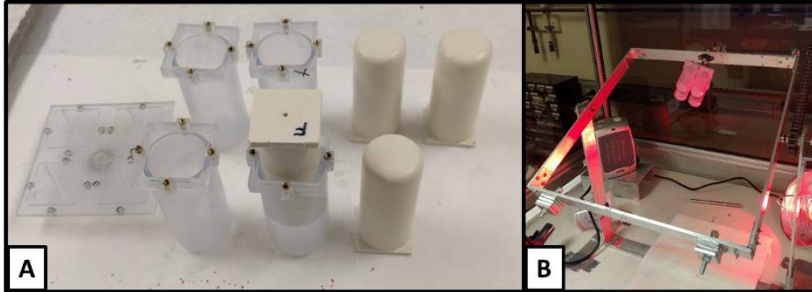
Rotational molding process A) Two-part mold for 4 cylindrical actuators B) Two-axis rotational molding of cylindrical actuators in heated chamber
